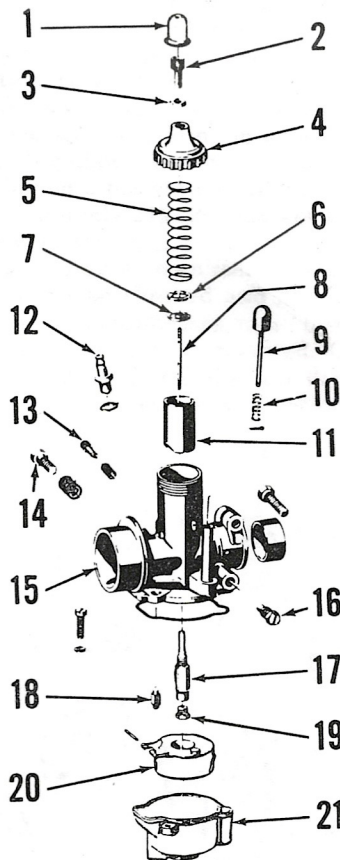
Exploded view of Bing carburetor used on 80B.
